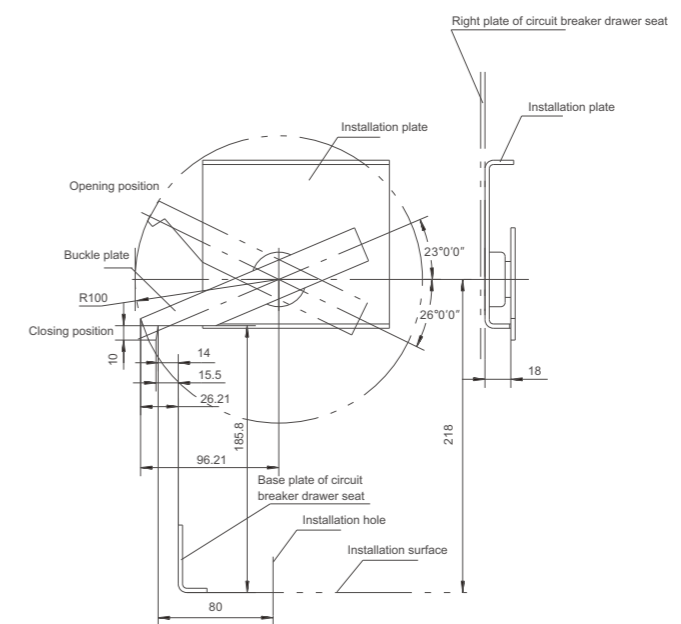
NA8-2500~7500 withdrawable type circuit breaker status door interlock installation dimensions
